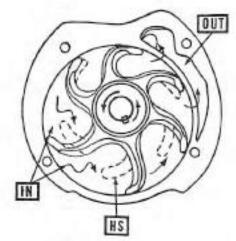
Schematic view of the rubber impeller type water pump used for cooling and for the automatic bailer unit. Impeller blades flex at slow speeds as shown by solid lines. The offest housing causes water to be drawn into pump body (IN) and forces water out (OUT) due to difference in area between blades. At high speeds, blades remain curved as shown by broken lines (HS) and pump operates by contrifugal action.
